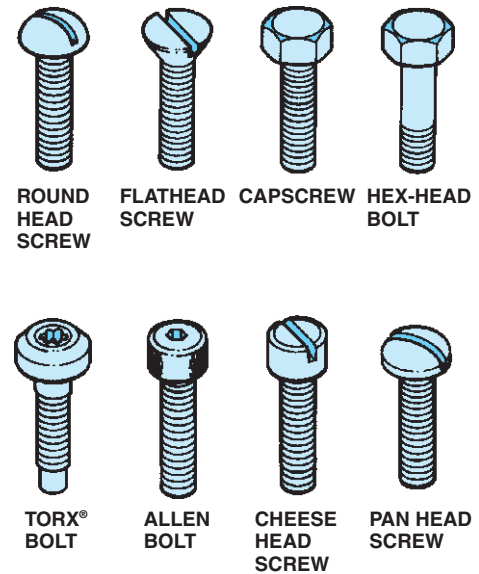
Bolts and screws have many different heads which determine what tool must be used.
